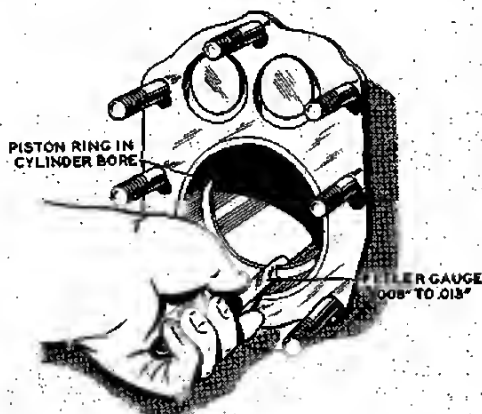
FITTING PISTON RINGS TO THE CYLINDER
